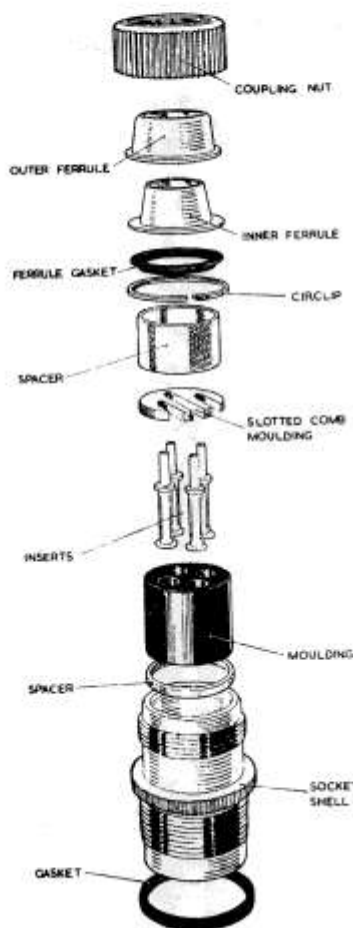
EXPLODED VIEW OF VIBRATION-PROOF SOCKET
